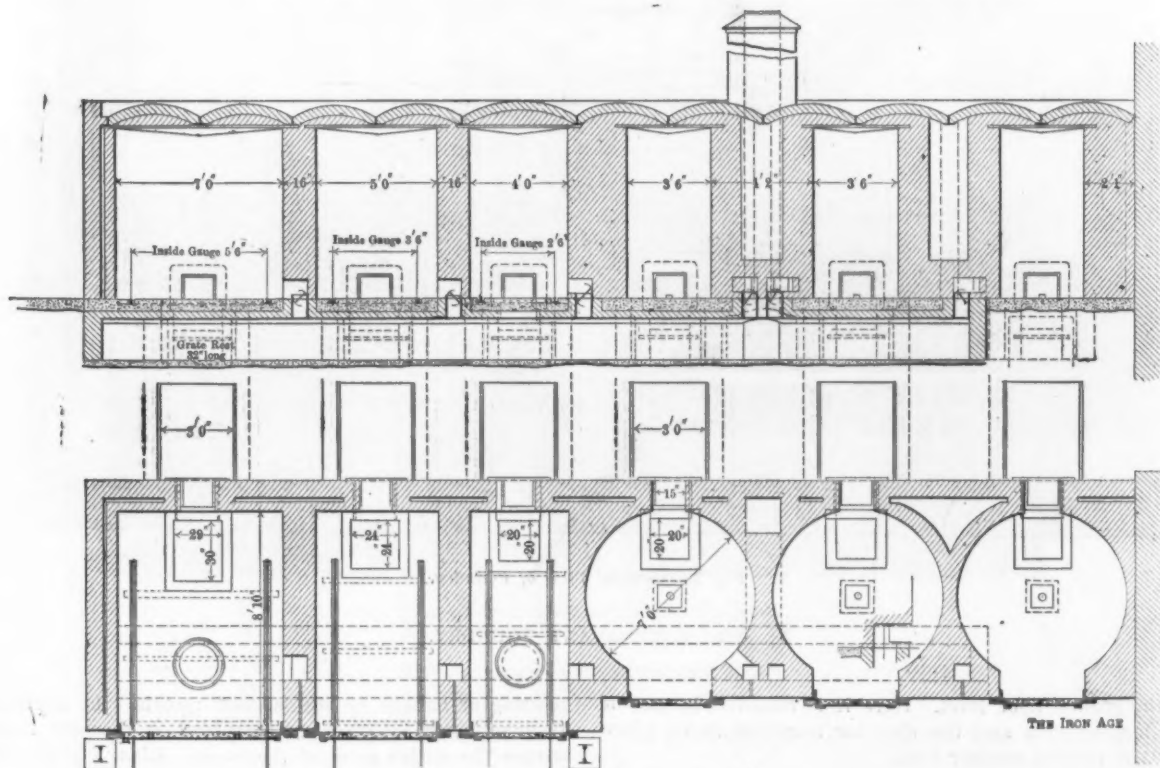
Plans and Vertical Sections of Core Ovens.
